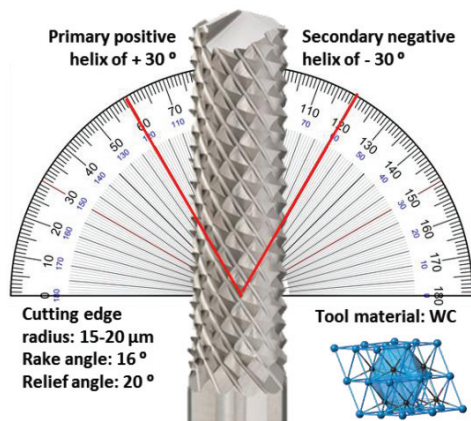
Burr style router tool used for CFRP full slot edge trimming.
